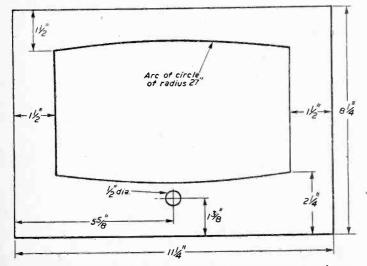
Cutting and drilling dimensions for the front of the cabinet.
